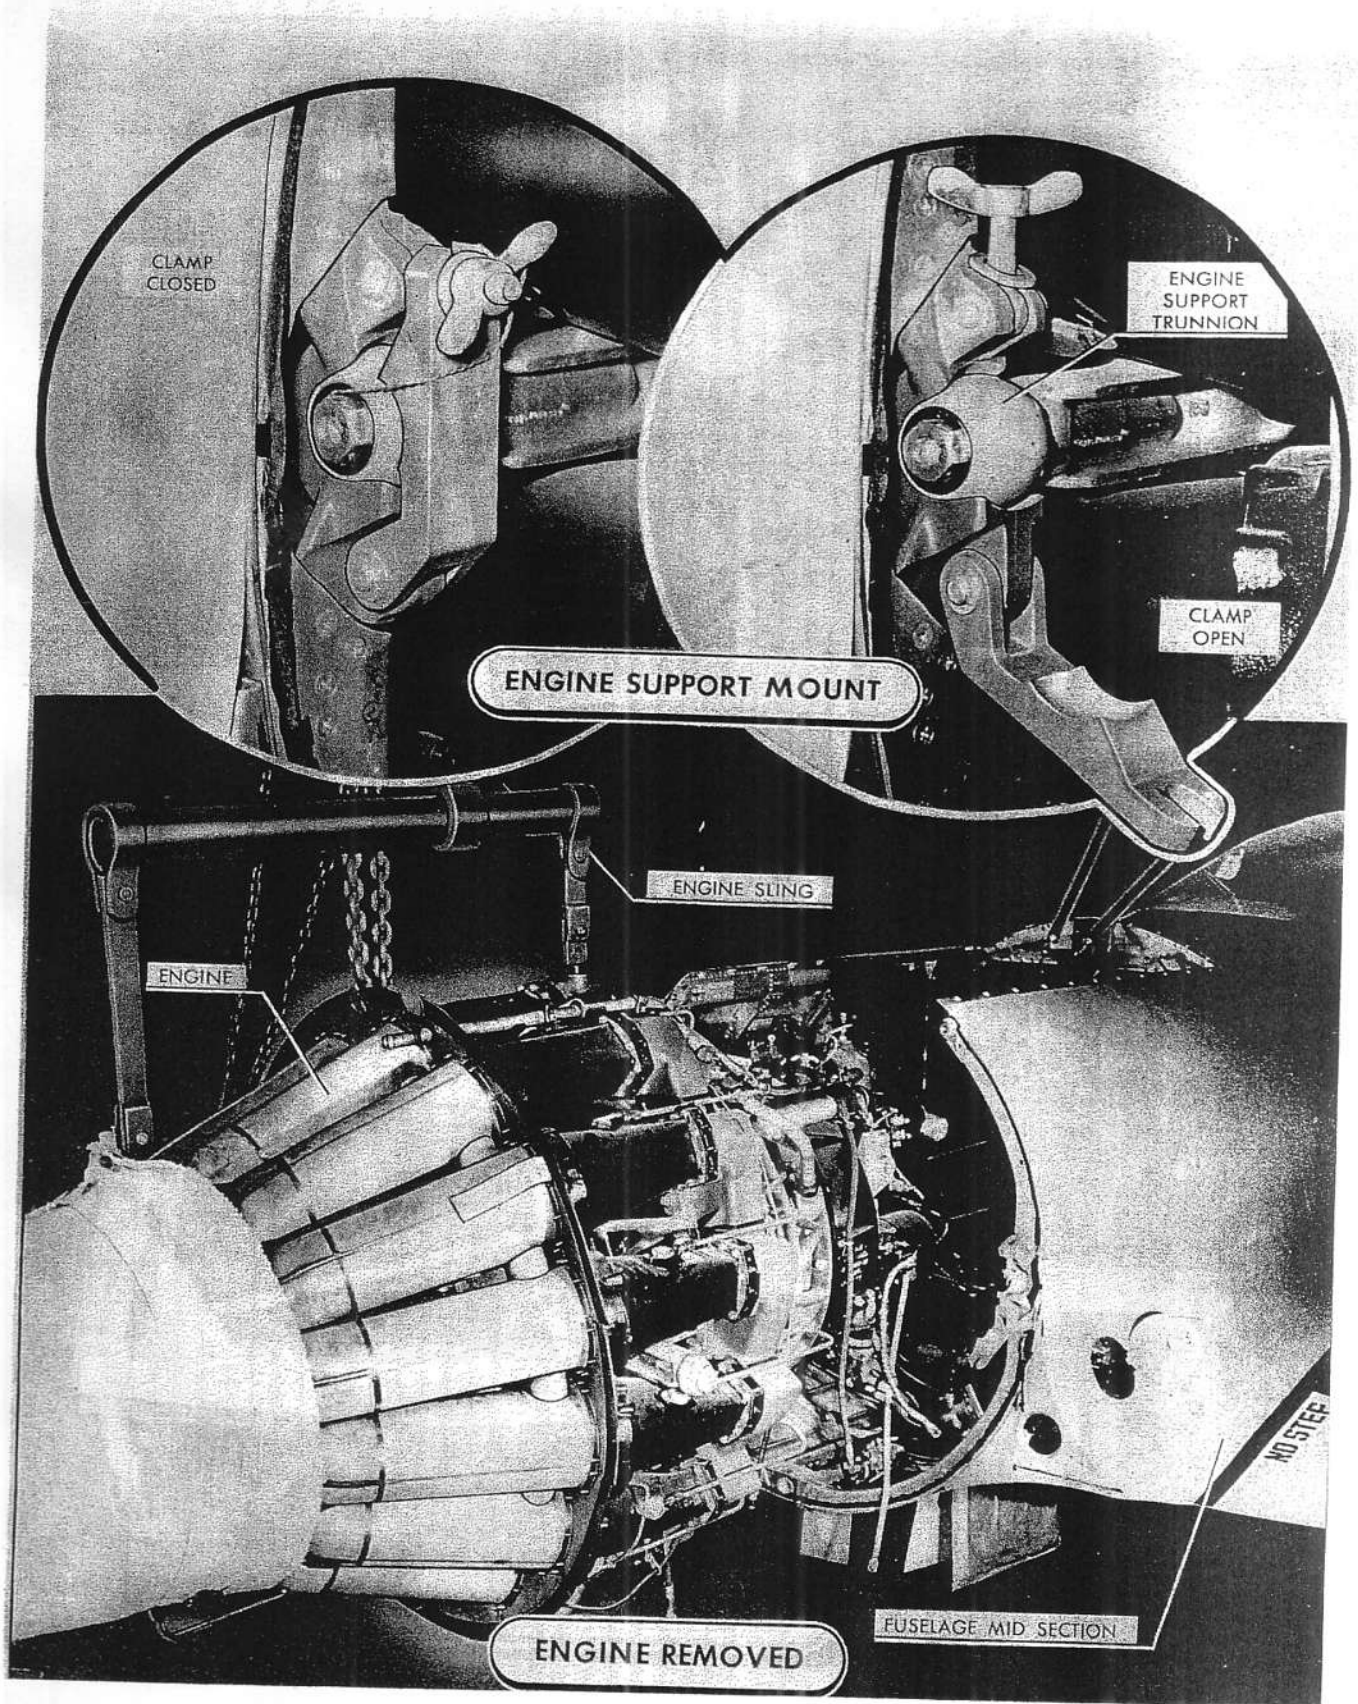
(Sheet 6 of 7 Sheets) — Aft Section and Engine Removal
